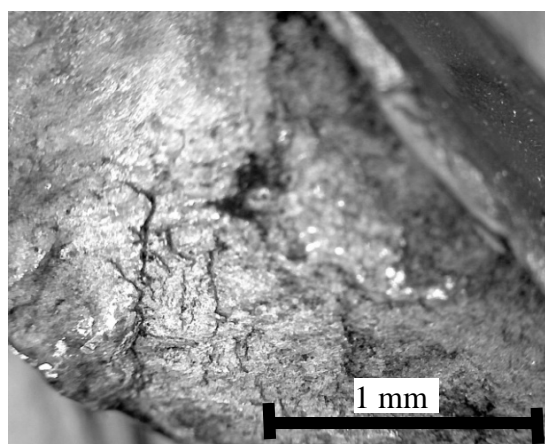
Fatigue fracture of real object (wheel tyre)
